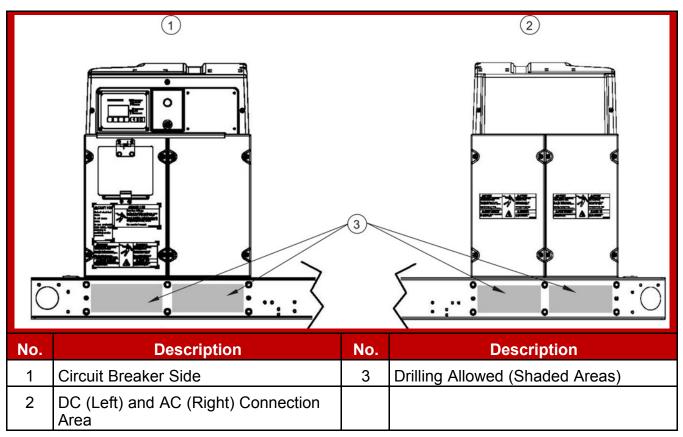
DRILLING LOCATIONS FOR SIDE ELECTRICAL CONNECTIONS
